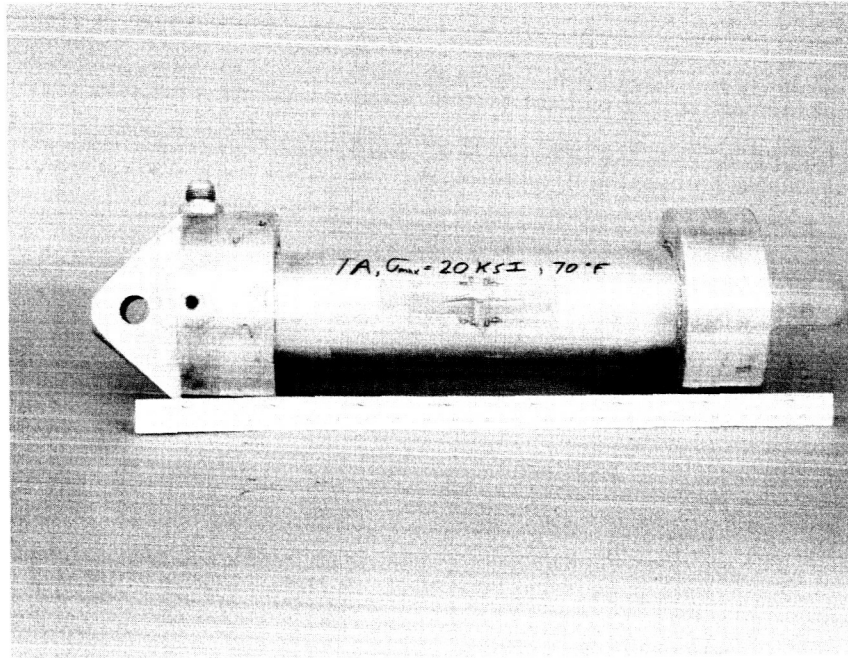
Failed 4-in. Diam Biaxial Test Specimen
